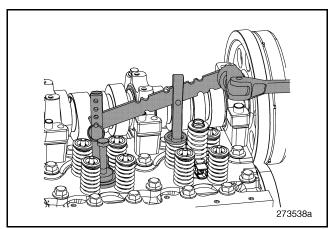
Installing Valve Springs with Alternate Valve Spring Compressor (Tool No. J 41989)
